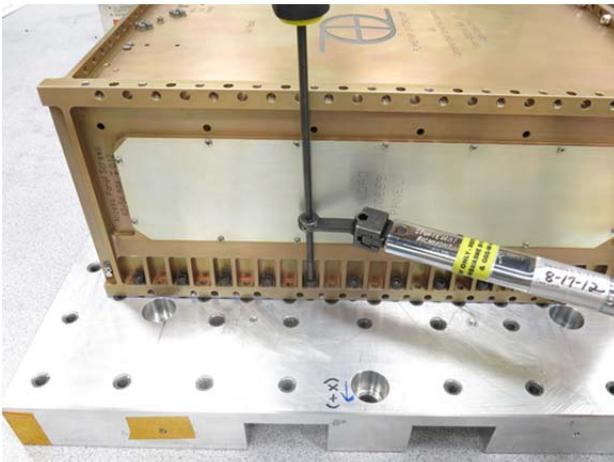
Using Thru Holes to Mount CSD via -Y Face
